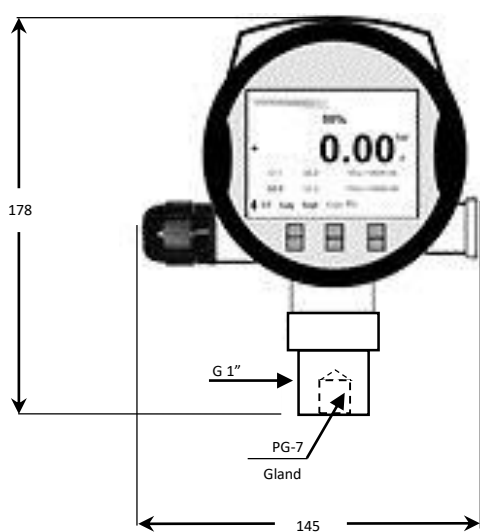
SB-WD Panel Dimensional Drawing s- all dimensions in mm.
